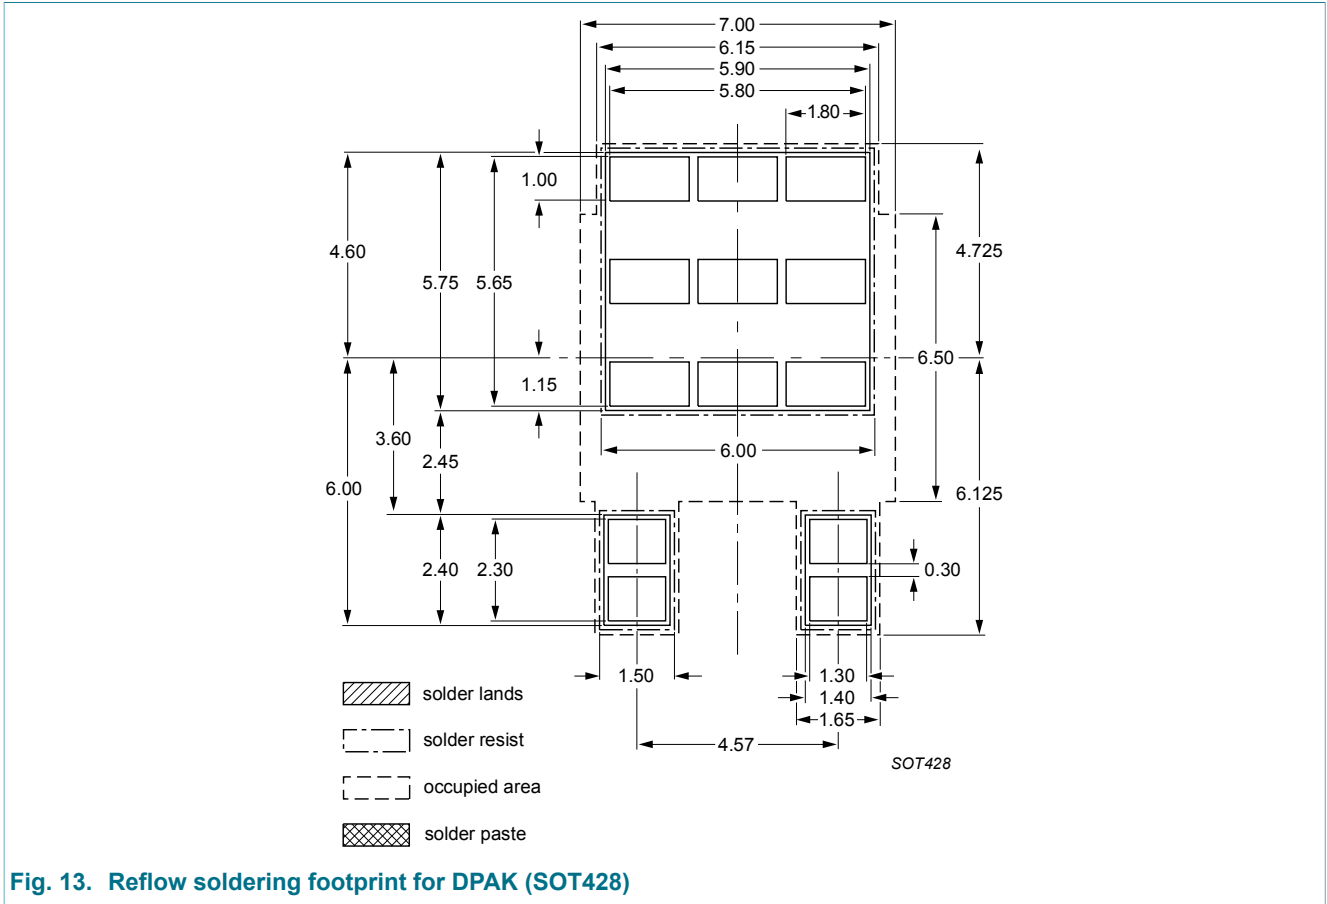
Reflow soldering footprint for DPAK (SOT428)
